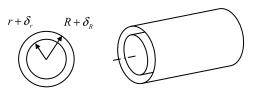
Fitting of valve core and valve sleeve only considering dimensional discrepancy.
